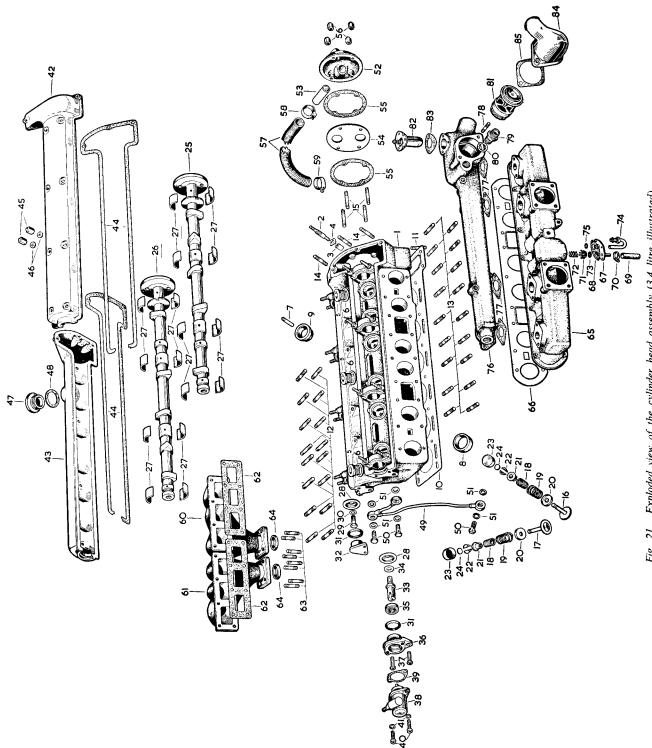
Exploded view of the cylinder head assembly (3.4 litre illustrated).
